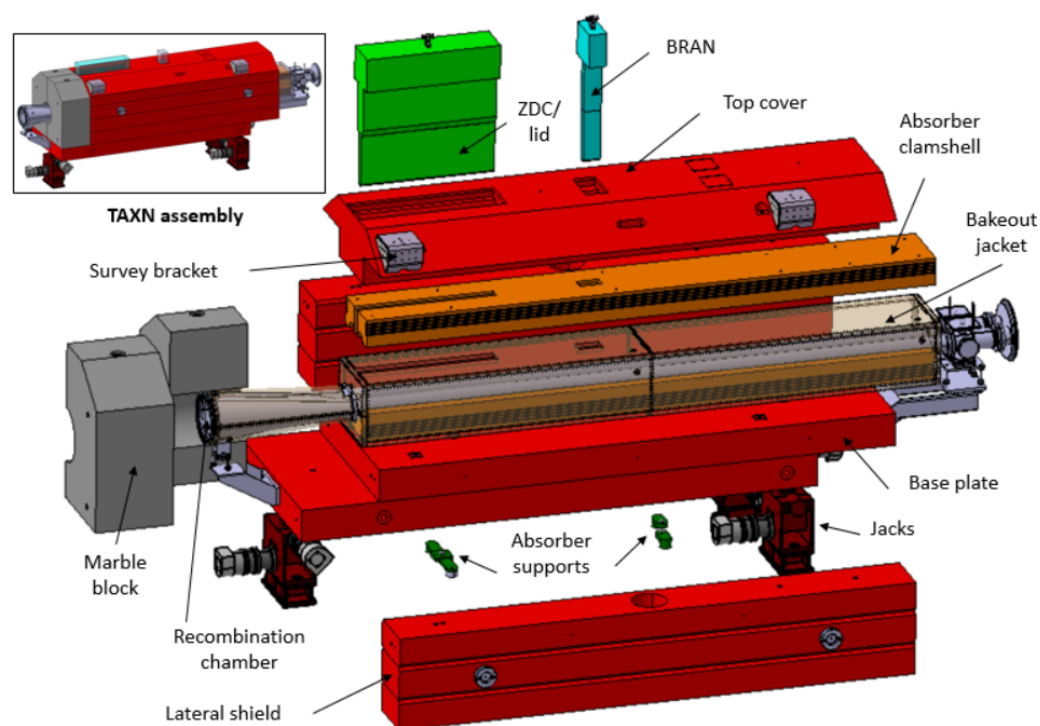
Exploded TAXN assembly. The TAN shares a very similar mechanical layout (longer copper absorber).
